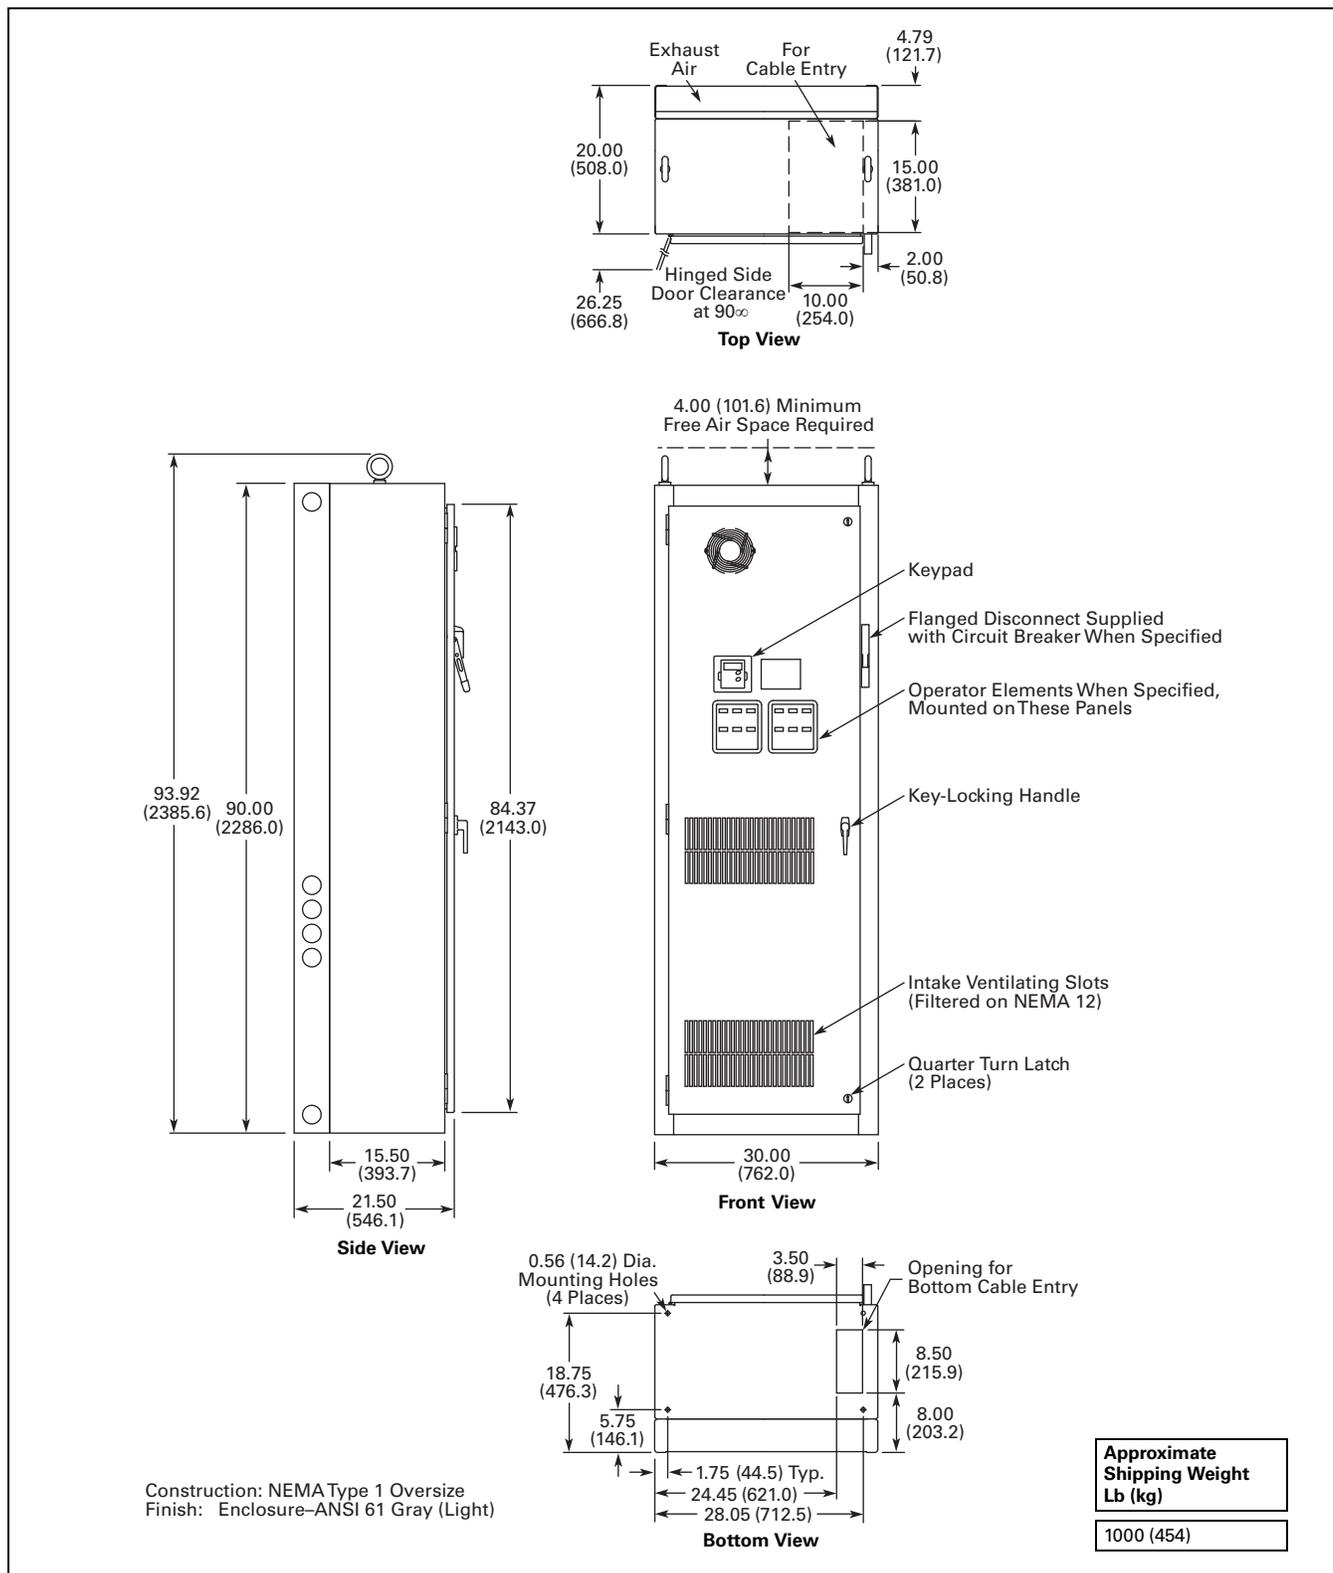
Enclosure Size 7—Approximate Dimensions in Inches (mm)
